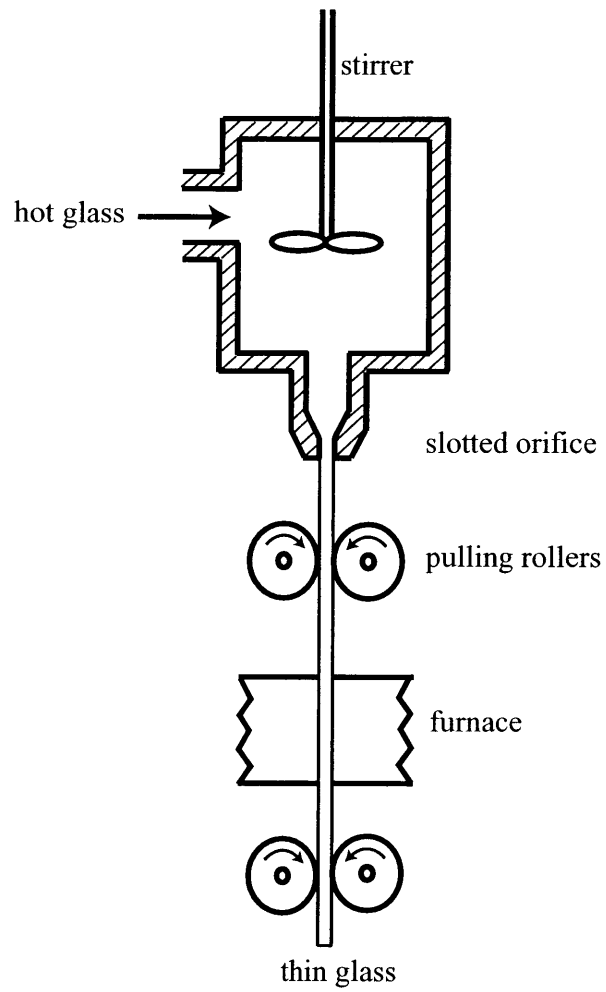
Manufacturing sheet glass using the slot-draw process
